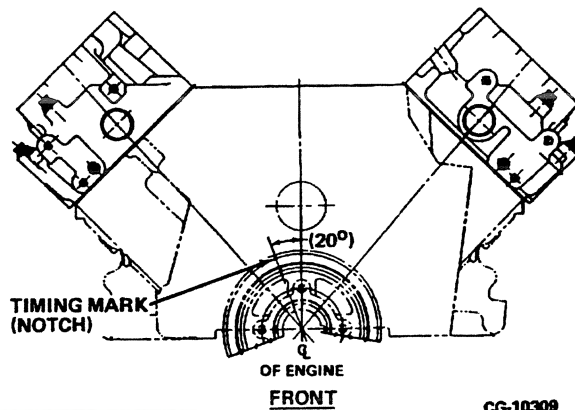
Engine Crankshaft Vibration Damper Timing Mark Positioned at 11:00 (20° from vertical) for Valve Lever Post Bolt Torque (Damper Behind Pulley)
